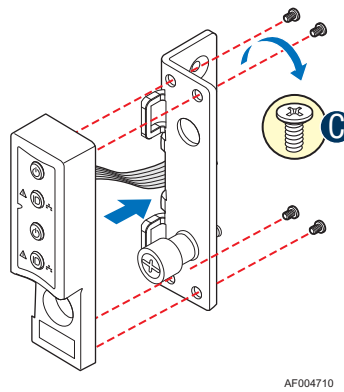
Installing the Front Control Panel Assembly to the Rack Handle
